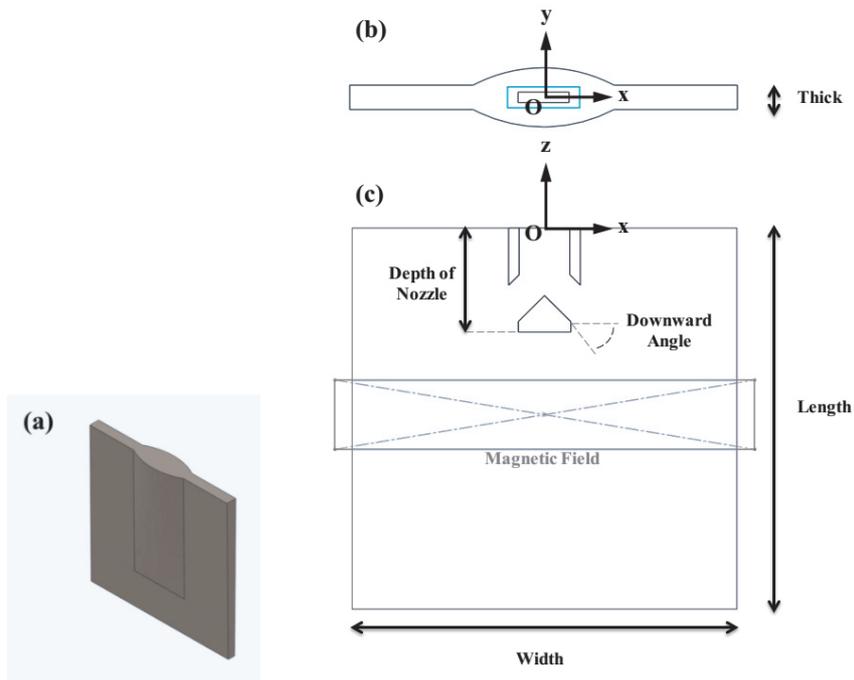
(a) Schematic of funnel-shaped mold. (b) Top view and (c) cross section of mold at $y = 0$
